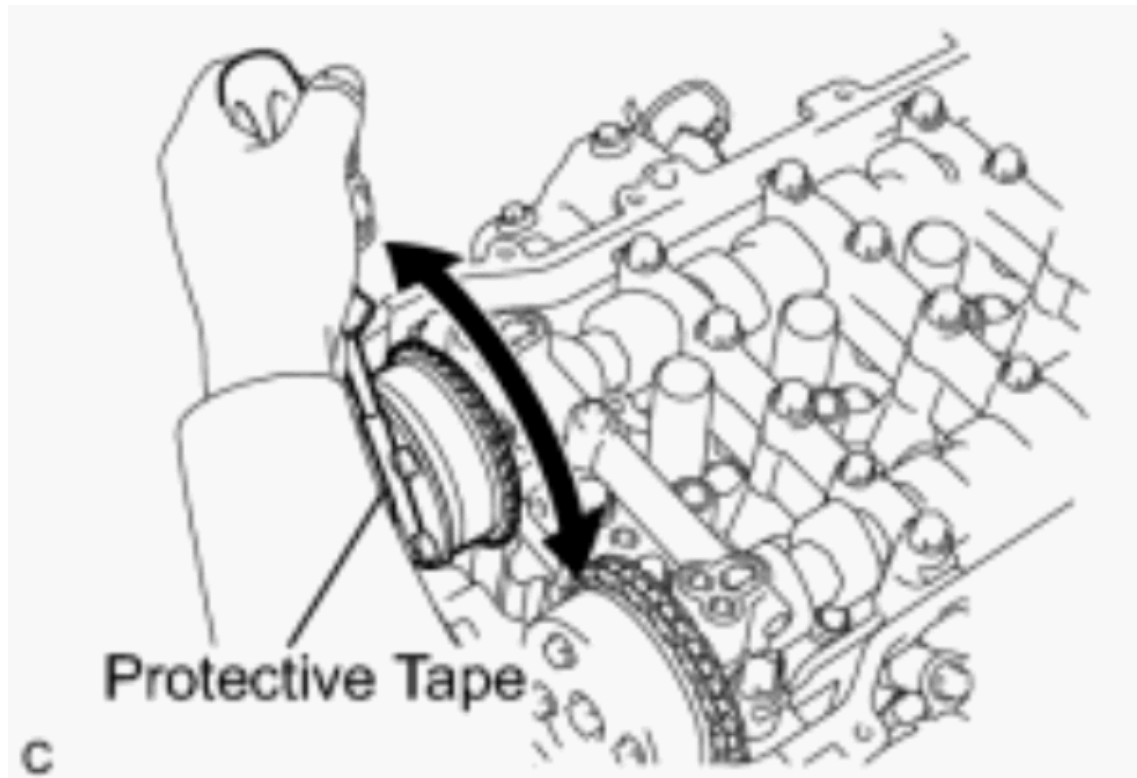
Turning Camshaft Timing Gear Turns Smoothly With Screwdriver Tip Taped
